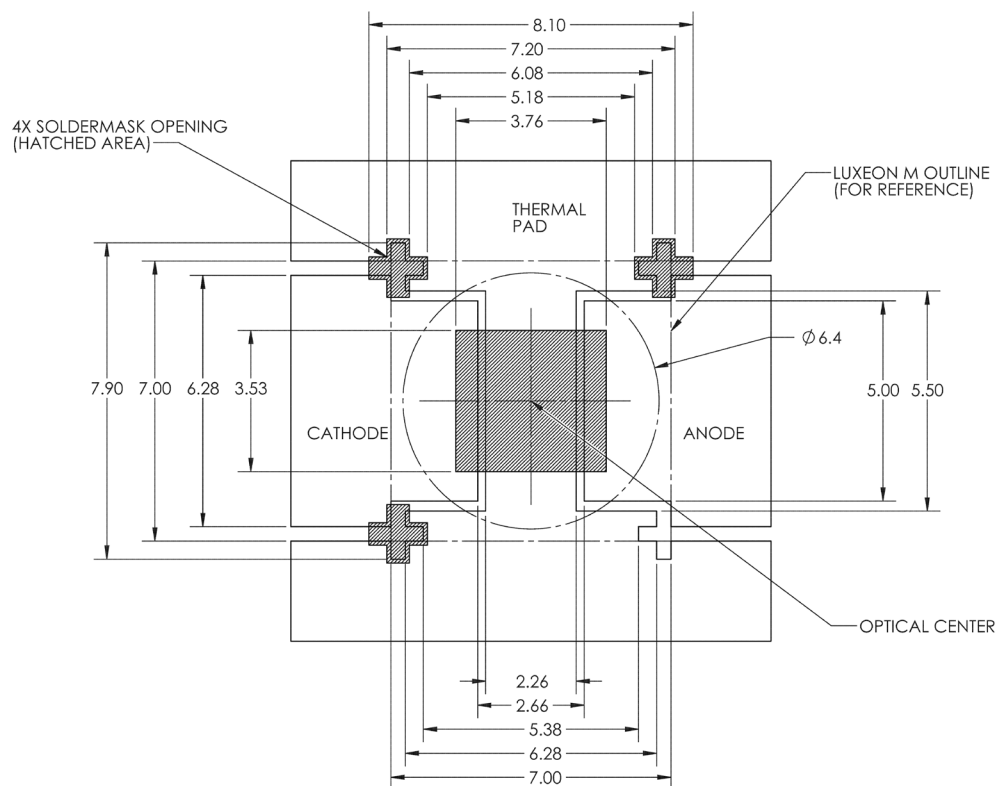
Recommended PCB solder pad layout for LUXEON M.
